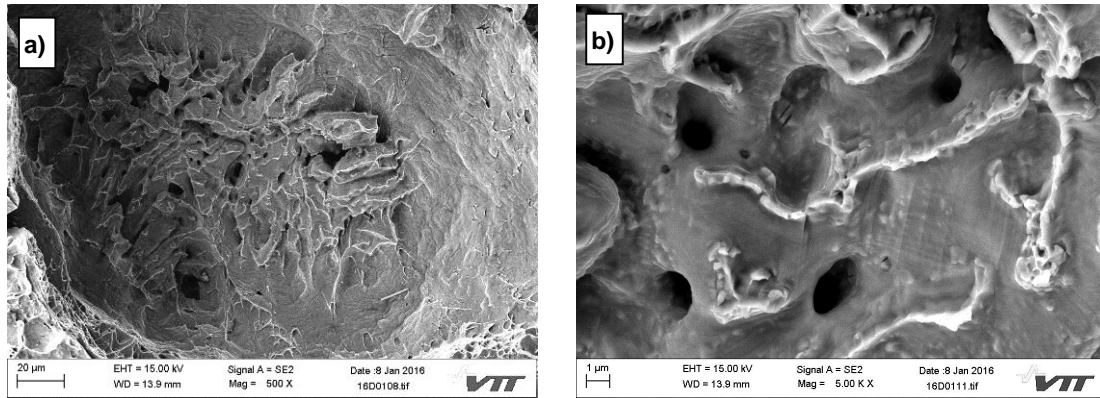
In a), a SEM (secondary electron) image of the fracture surface of the J-R test specimen JR1 showing an area where the crack has propagated in the weld metal side of the joint. At the bottom of the large dimple there is a small weld defect and some pores. Detailed view of the weld defect is shown in b).
